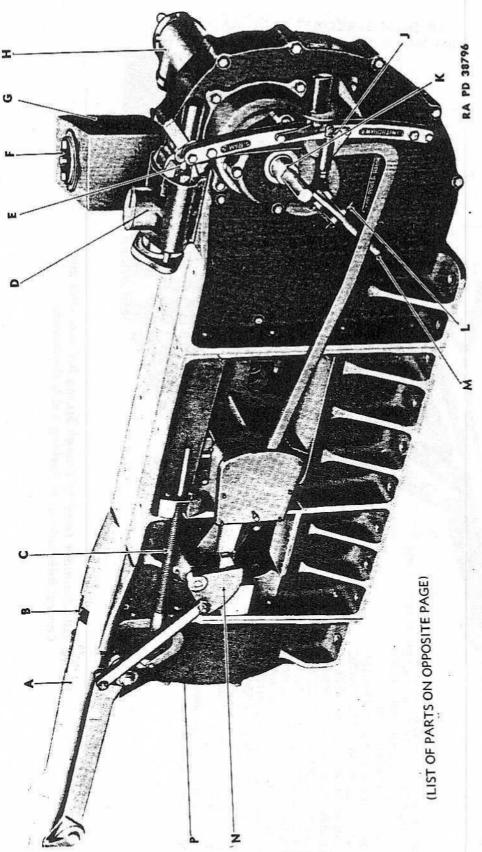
Rammer (Left Side) with Loading Trough in Extended Position (Parking Tables Removed)
